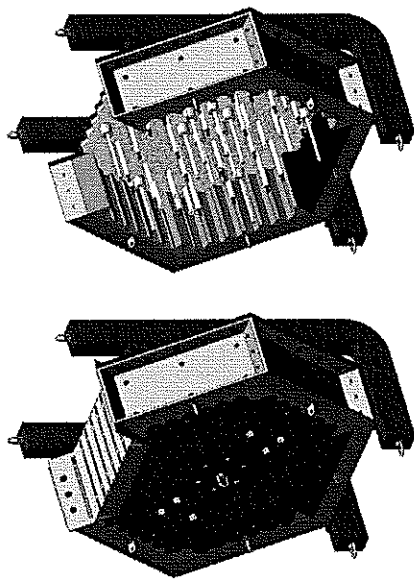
RENDER OF THE CORE MOLD SHOWN IN THE "413105 UPPER REFLECTOR #2" CONFIGURATION: FULL ASSEMBLY (LEFT) AND WITH THE FRONT PLATE, TOP AND CAP REMOVED FOR CLARITY (RIGHT).
